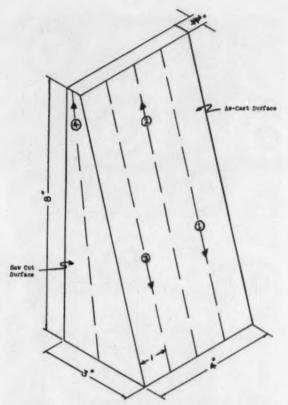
Sketch of position A of a wedge block casting used in surface weld bead tests. Labled lines show order and direction of bead application. All surfaces, except as otherwise noted, are as-cast.
